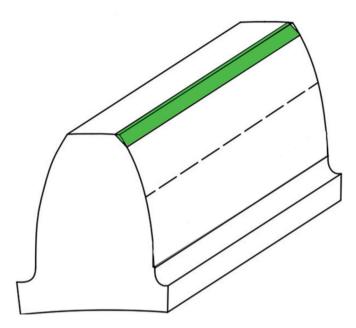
Schematic of tip relieving of a spur gear tooth flank surface.
